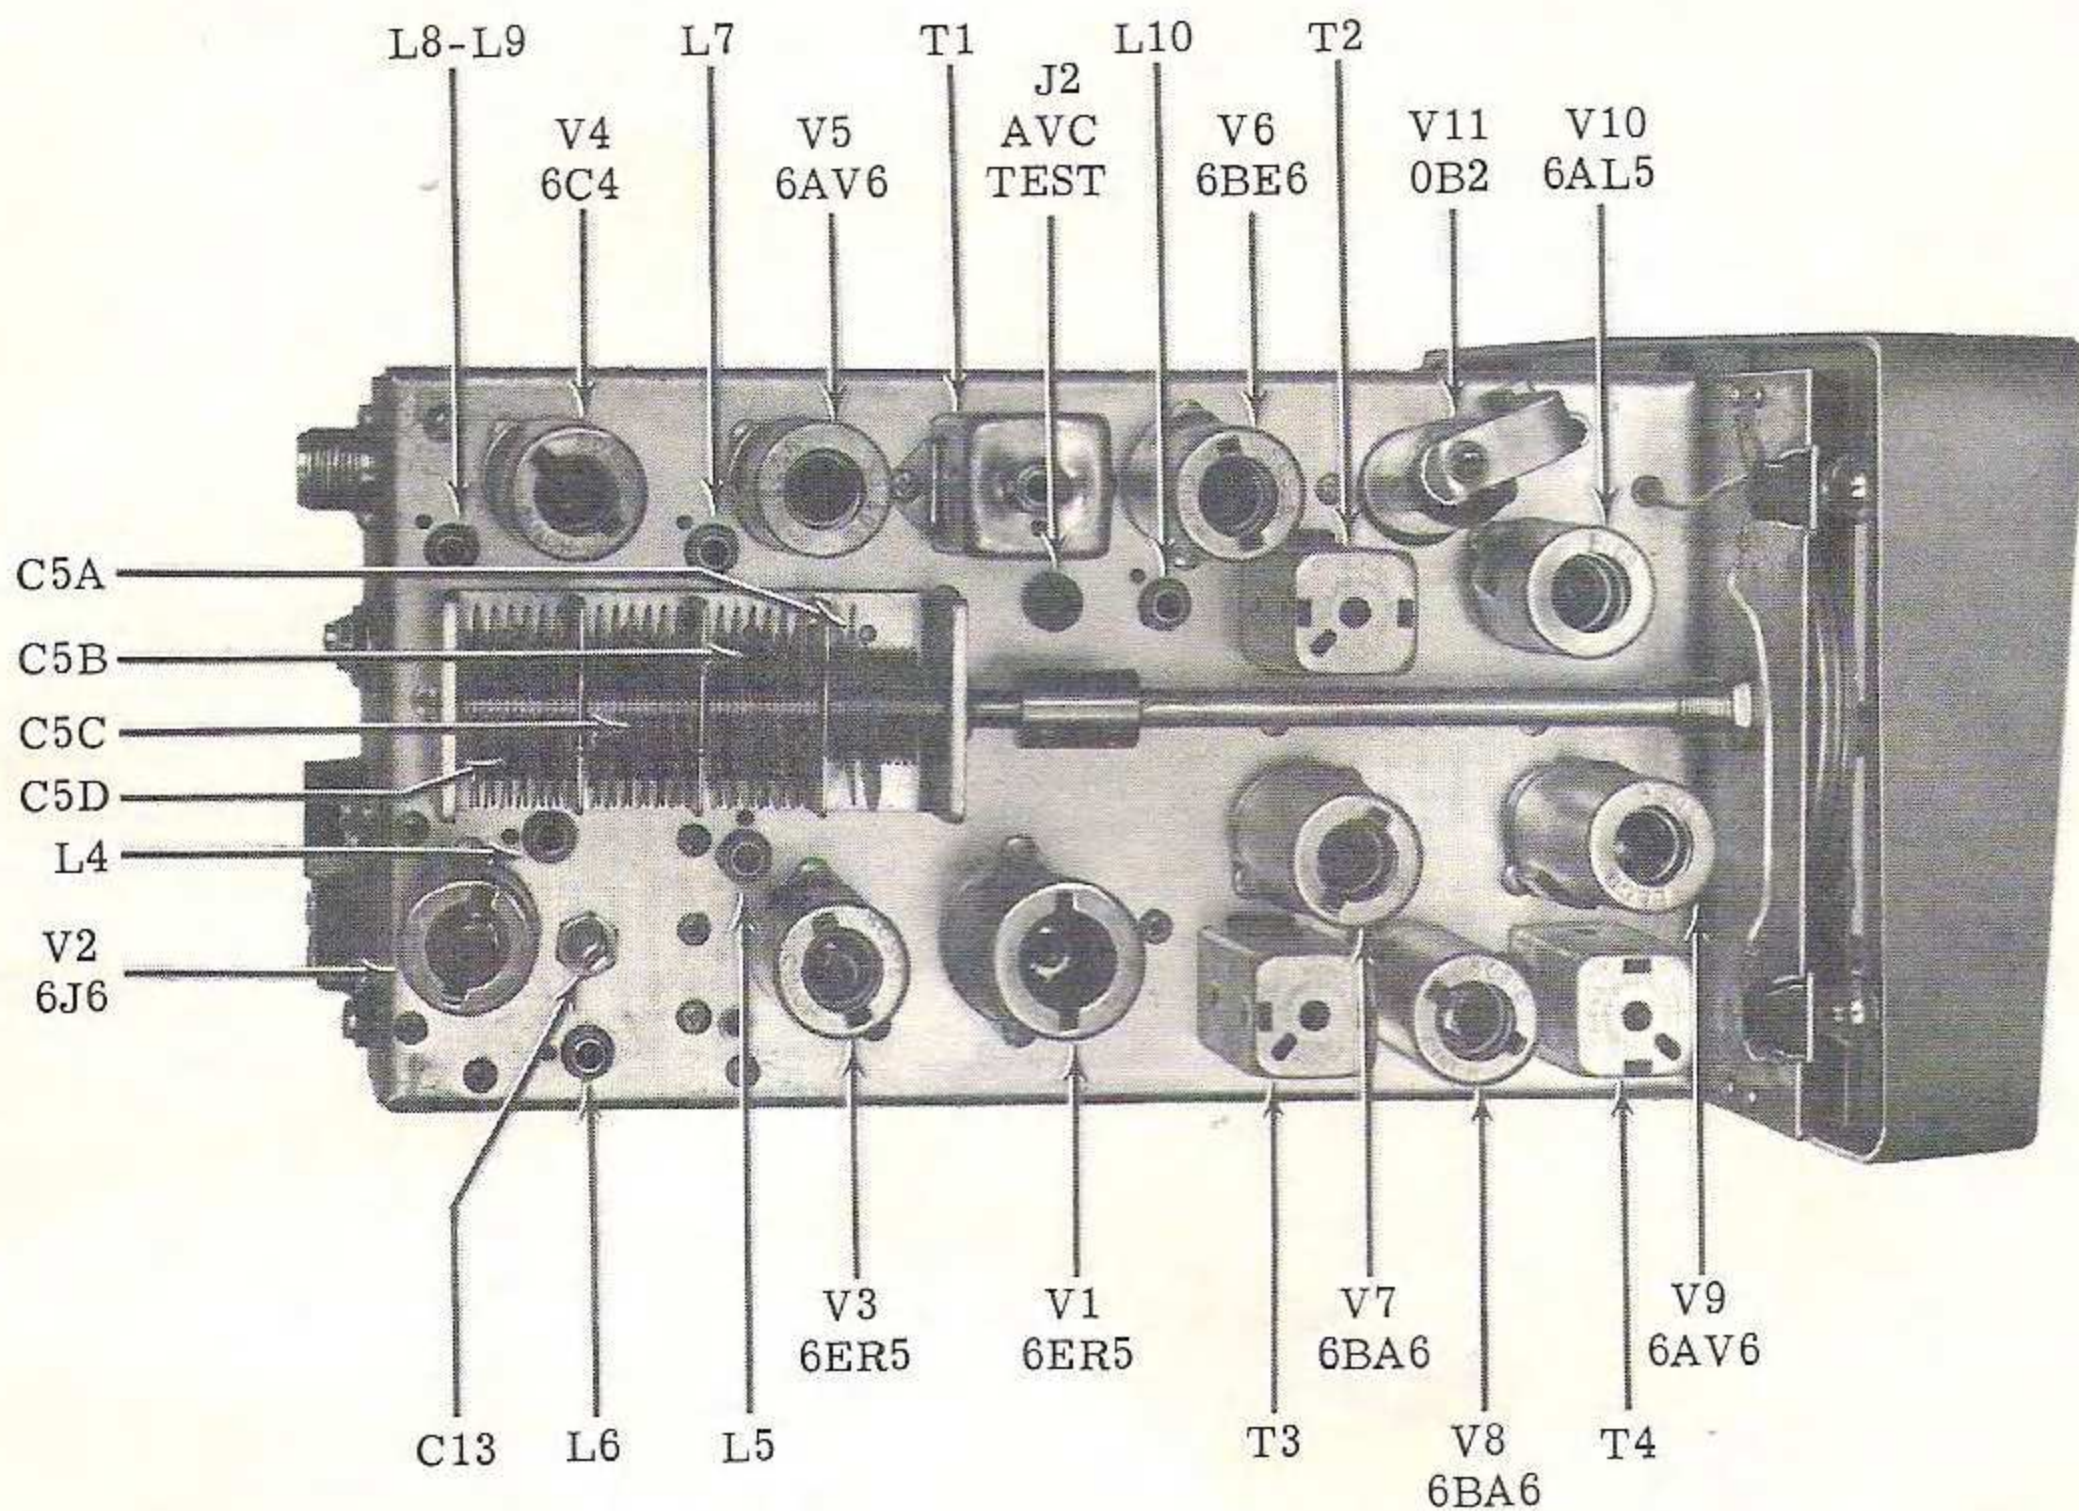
, RECEIVER SUB CHASSIS, TOP VIEW
